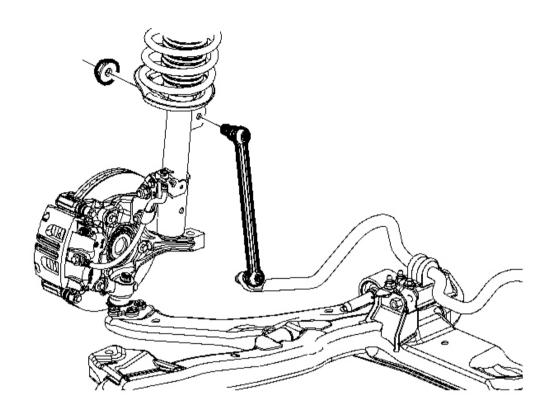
Stabilizer Link & Strut Nut Courtesy of GENERAL MOTORS CORP.
